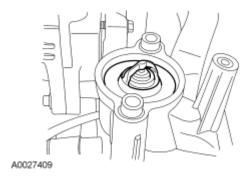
Thermostat Courtesy of FORD MOTOR CO.
